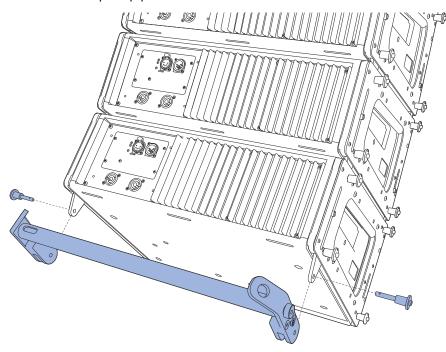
PBF-LINA Pull-Back Frame Attached to Bottom LINA, Exploded View
